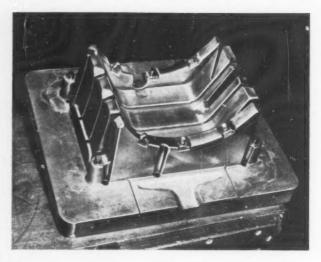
The Die Insert for Forming the Ribbed Internal Portion of the Base Casting in Fig. 8 was Machined from a Solid Steel Block, and is Here Seen in the Finished Condition
